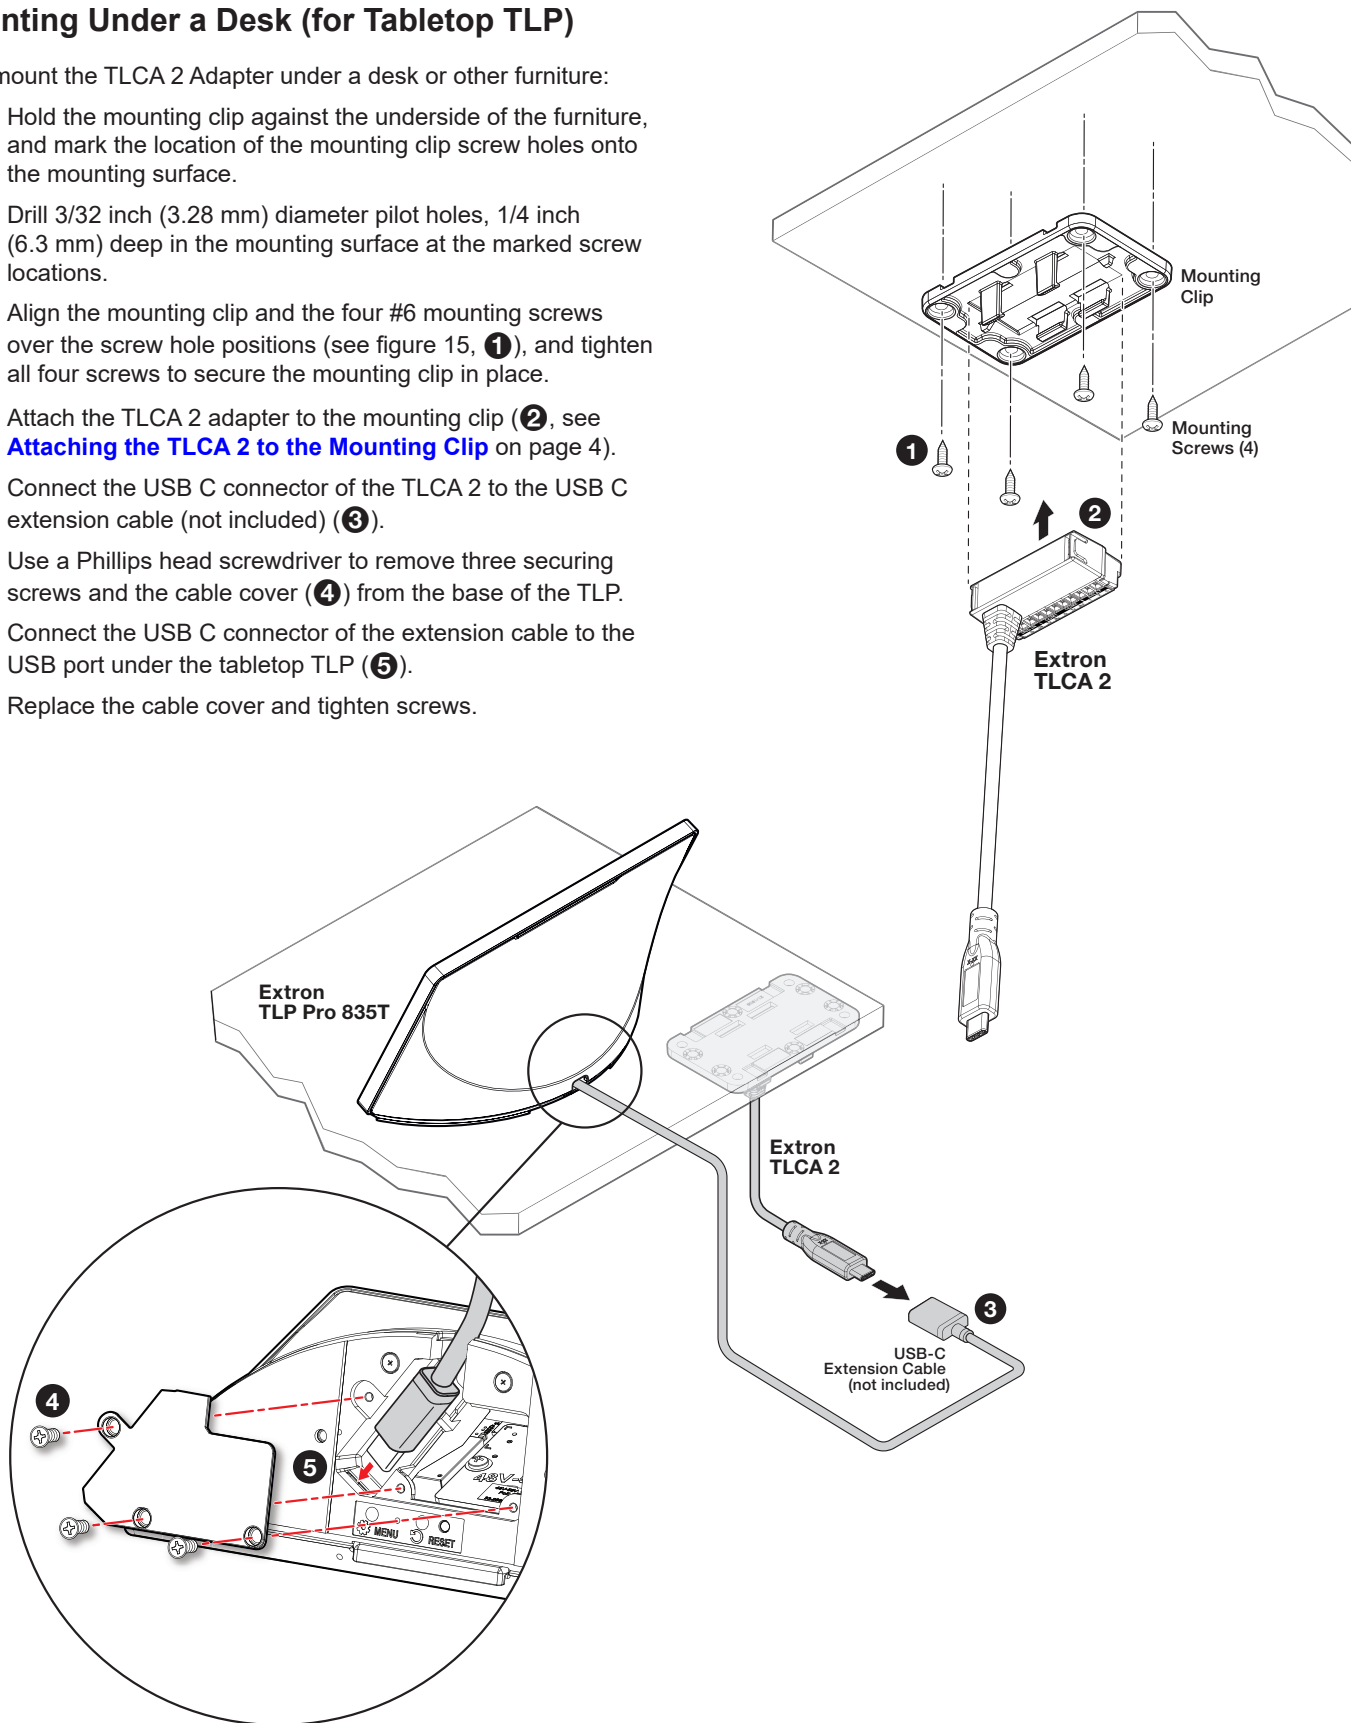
Mounting Under A Desk (Tabletop Tlp With USB C Extension Cable)
